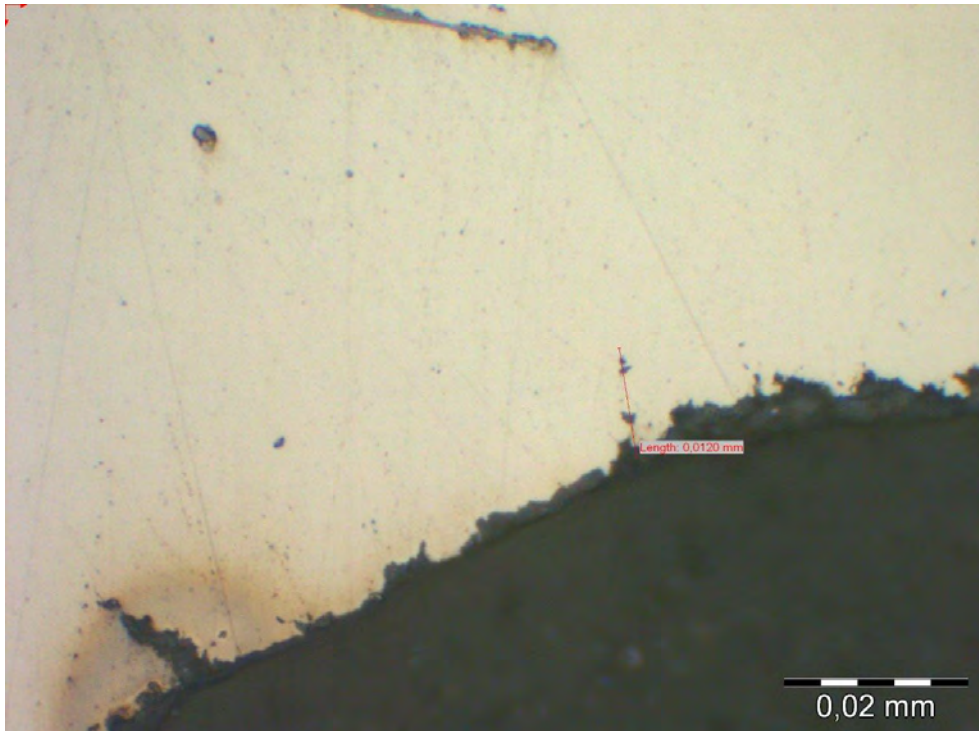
Cut two in crack at segment C, third ridge on barrel no. 14389
